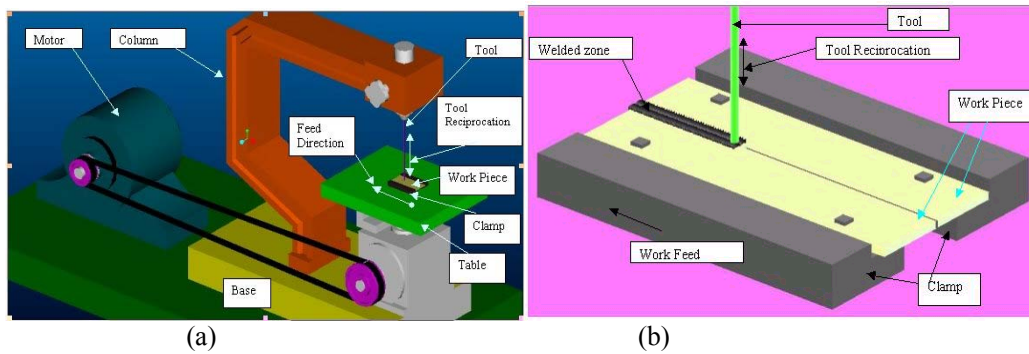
(a & b) The machine set-up and arrangement for welding.
